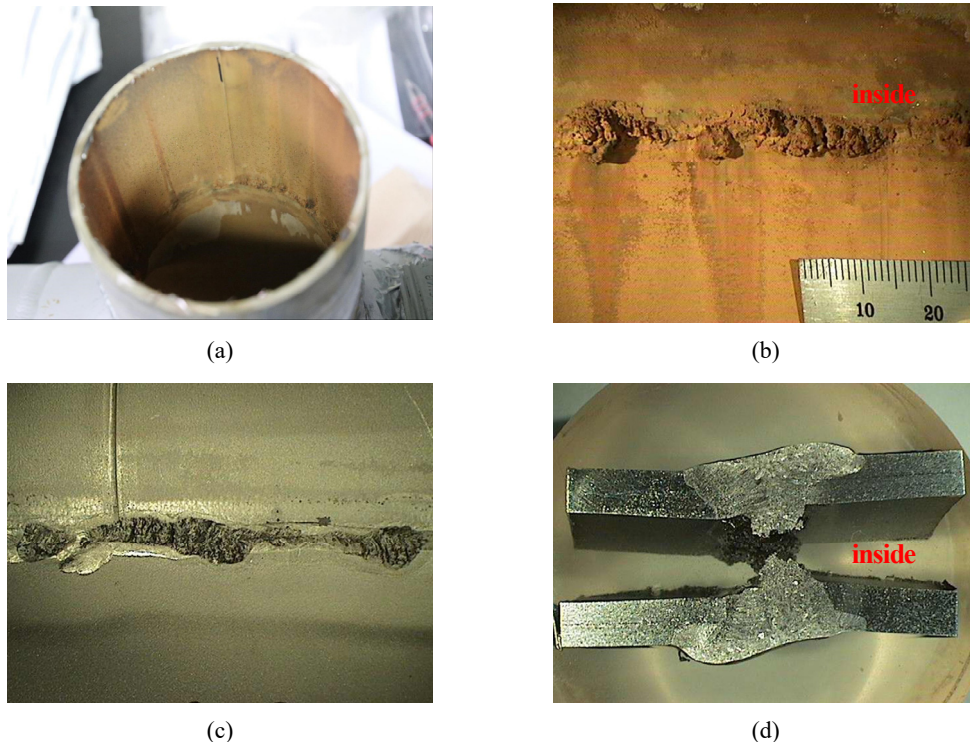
OM images showing inner surface of weldment in No 2 of Fig. 2 (a) and (b), after descaling (c), and cross section (d).
